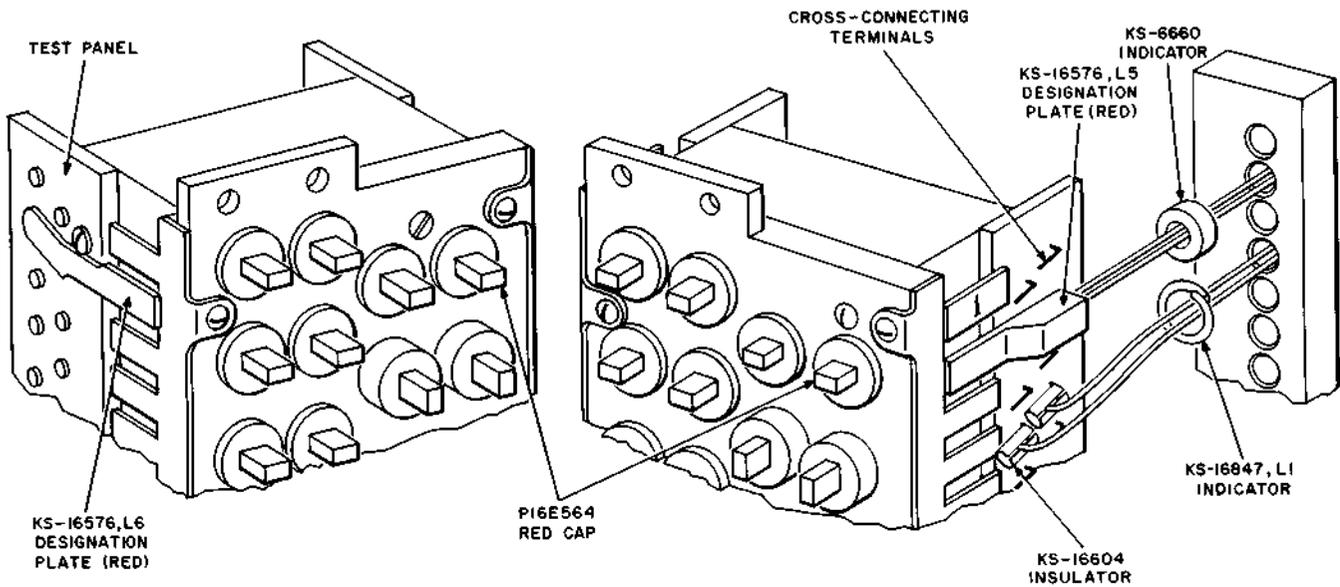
Indicator and Terminal Punching Insulators on Protector Mounting
